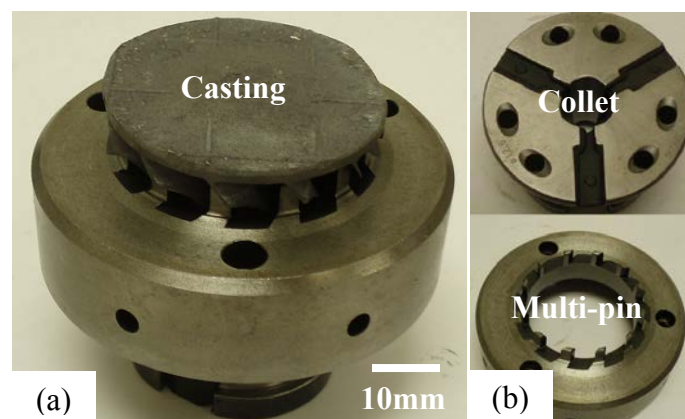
Main spindle workpiece holding (a) assembly and (b) collet and multi-pin unit for Operations 1 to 5
